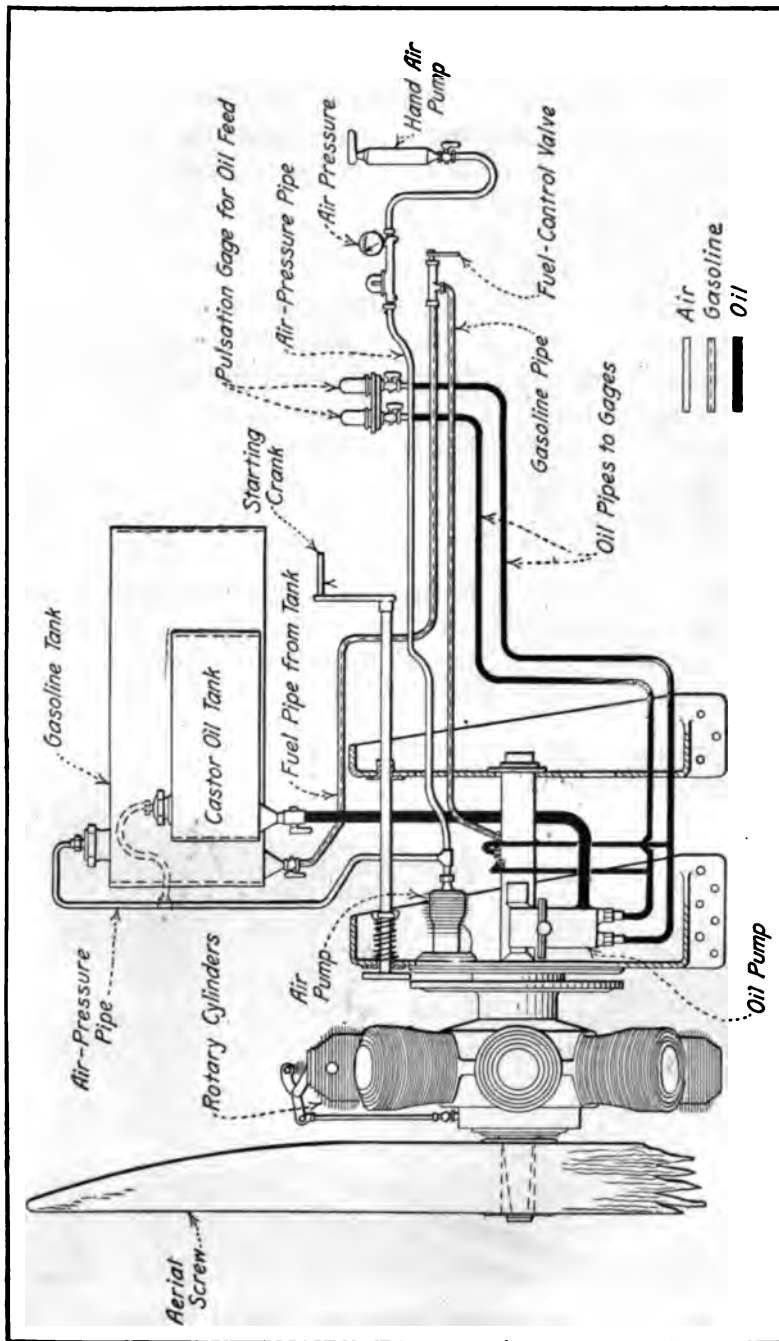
How Rotary Motor is Installed, Showing Air, Fuel and Oil Lines.
